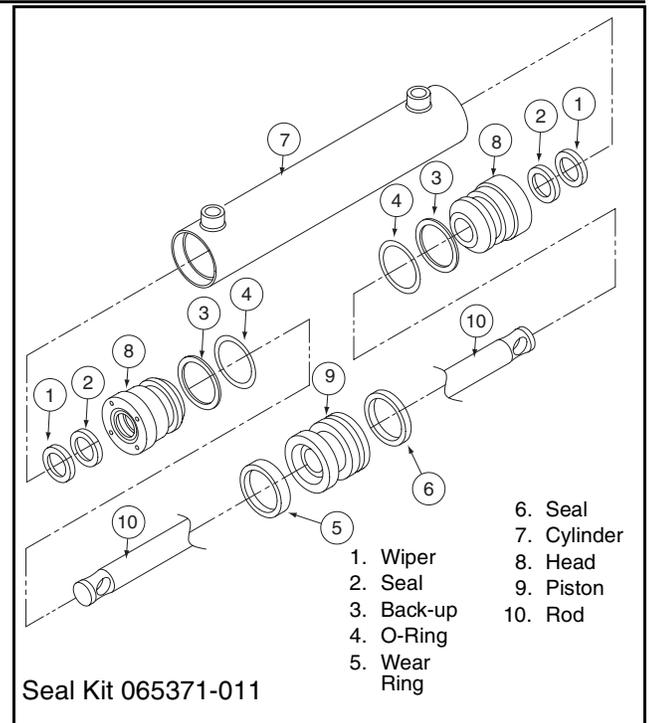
Steering Cylinder AssemblyASSEMBLY AND INSTALLATION
